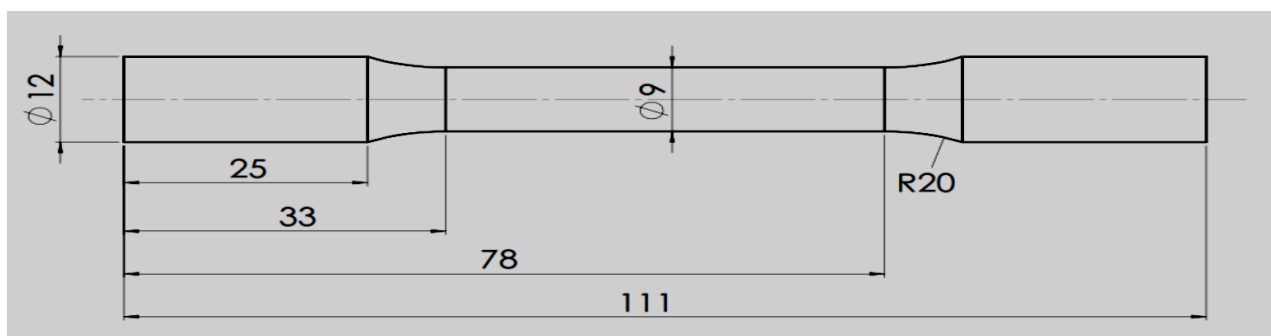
The dimensions of the tensile testing specimen in relation to ASTM E8-09 [1].
